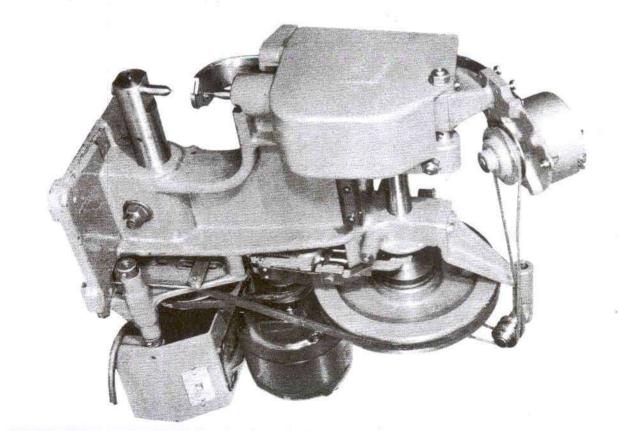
USMC Eyeletting Machine-Model G. Front-right View
